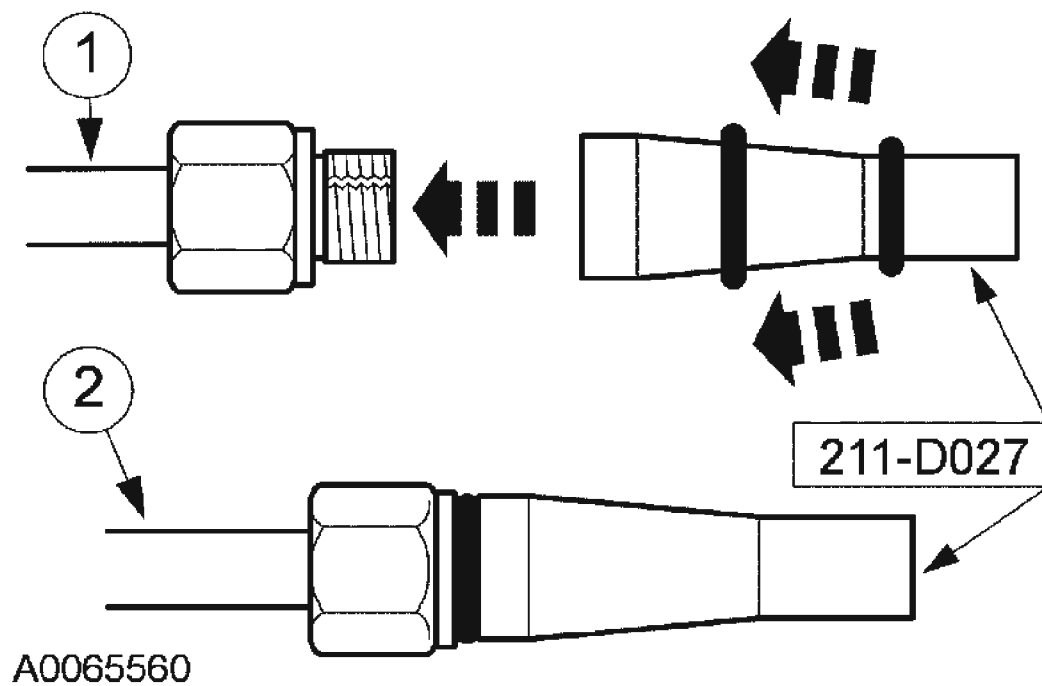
Installing O-Ring Seal Onto Steering Gear To Power Steering Pump Union Using Special Tool
